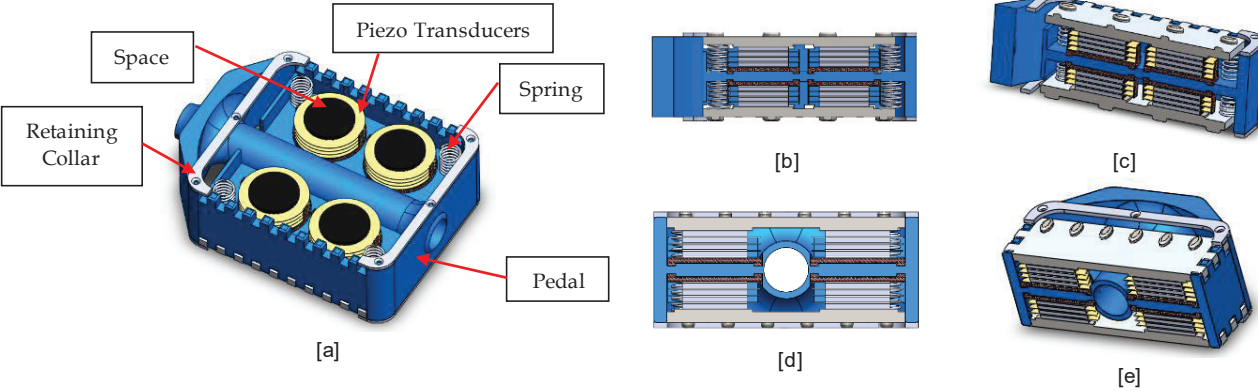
Pedal Design Sectional Views [a] Without Pedal Outer Cover [b],[c] Front Plane Sectional View [d],[e] Right Plane Sectional View
